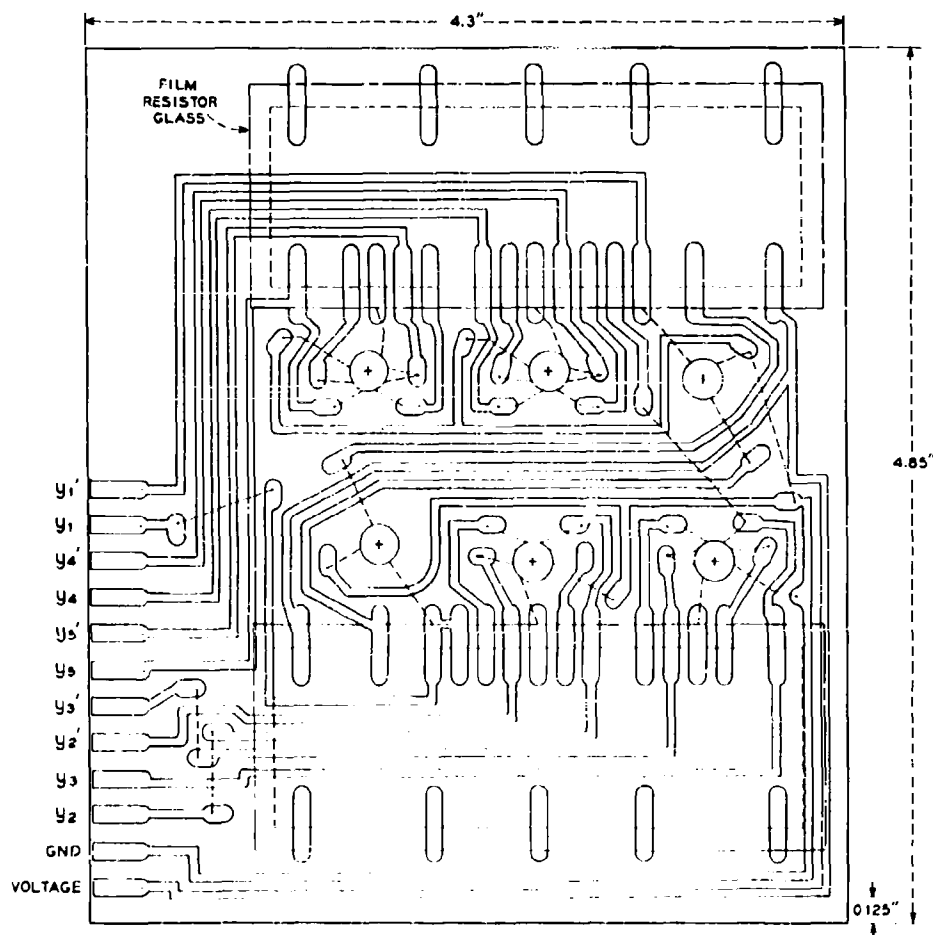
Layout plan of multivibrator and binary counters on printed-wire board showing position of integrated packages and tantalum film packages.
